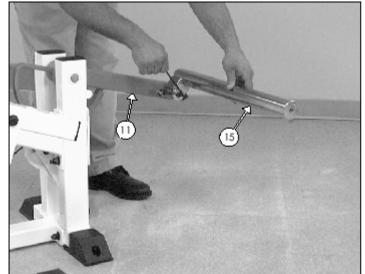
Next, attach the Swivel Foam Roll Tube (#15) to the Pivot Arm (#11) and secure it into place using one Button Head Socket Cap Screw 3/8-16 X 1 (#29), one Split Lock Washer 3/8" (#80), and one Chrome Washer 3/8 X 1 1/2 (#31).
